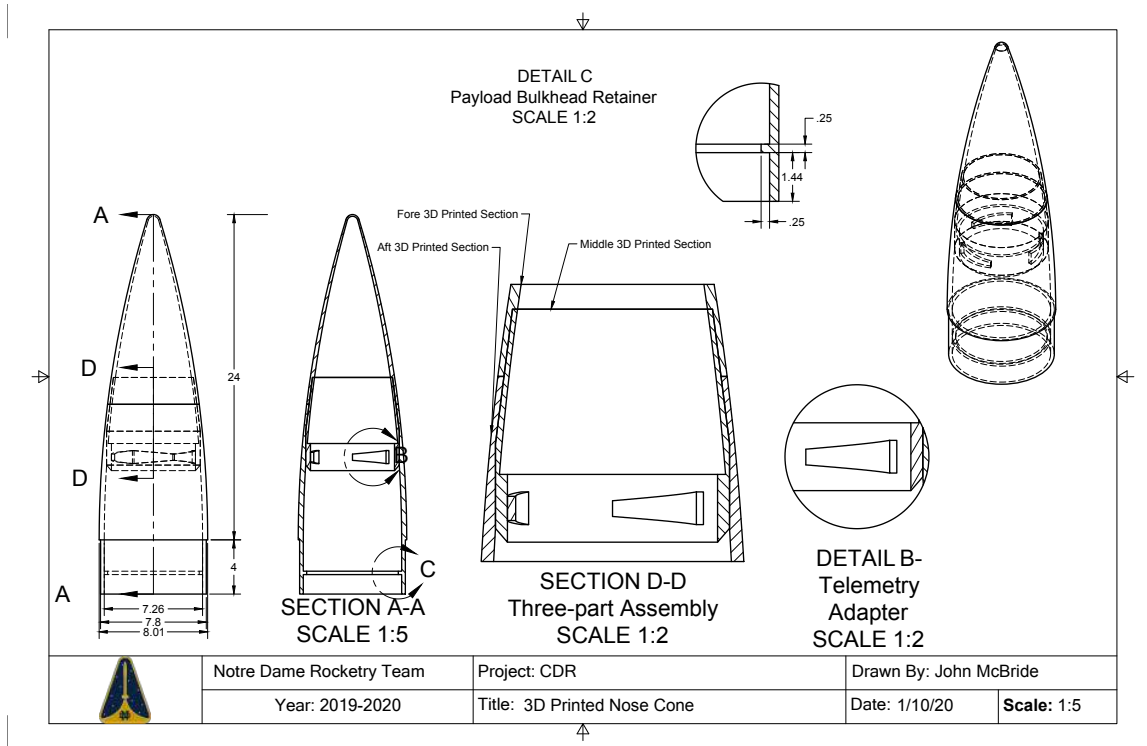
Student Fabricated Nose Cone Engineering Drawing
